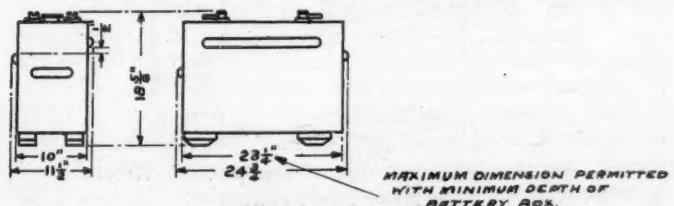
Maximum Dimensions of Batteries Assembled in Trays
